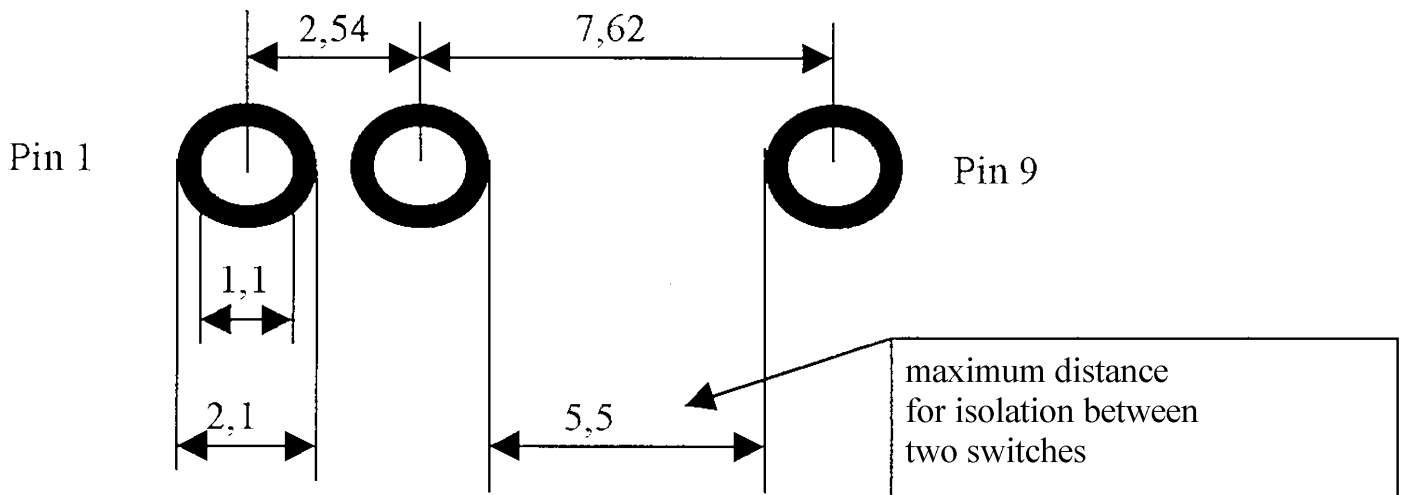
Measurements in [mm] for solder pads (as a proposal for the design) and solder pad gaps (partial drawing)
